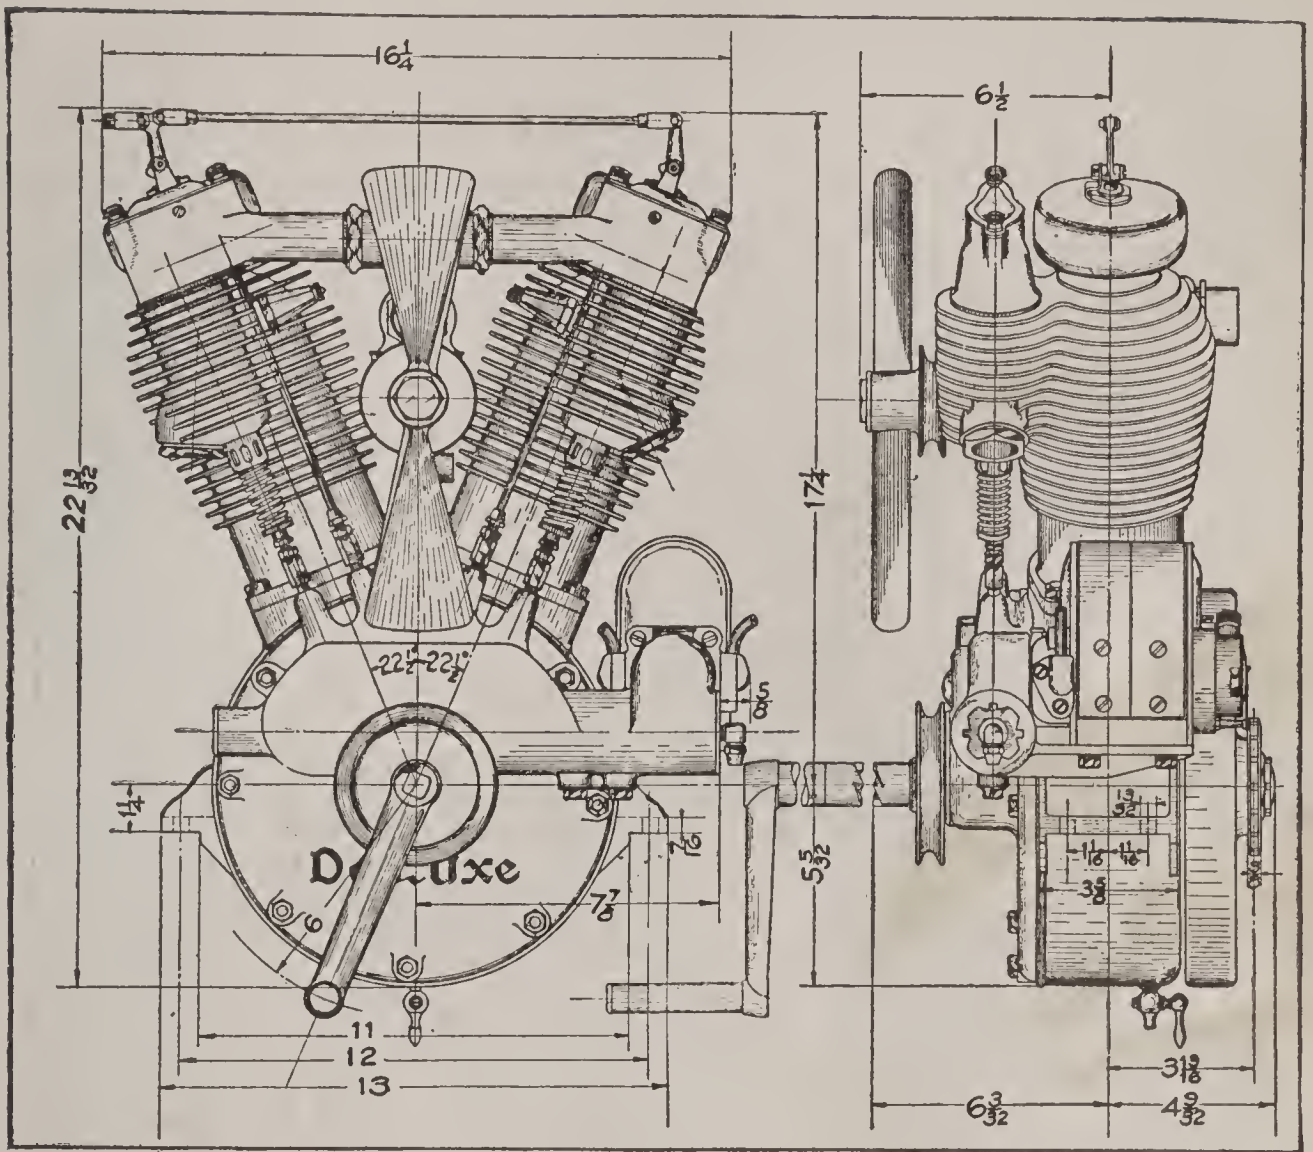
Diagram Giving Principal Dimensions of Spacke De Luxe Cyclecar Motor.
